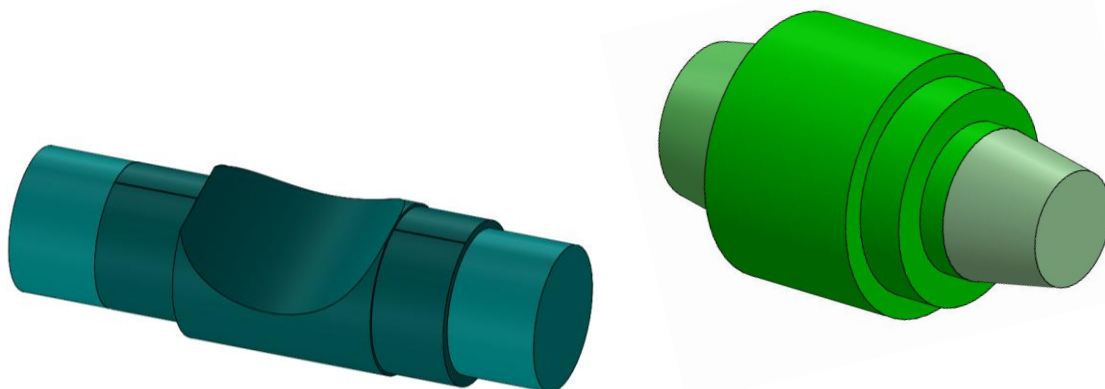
Shafts with bore, for gear wheel bore (right) and worm screw bore (left)
